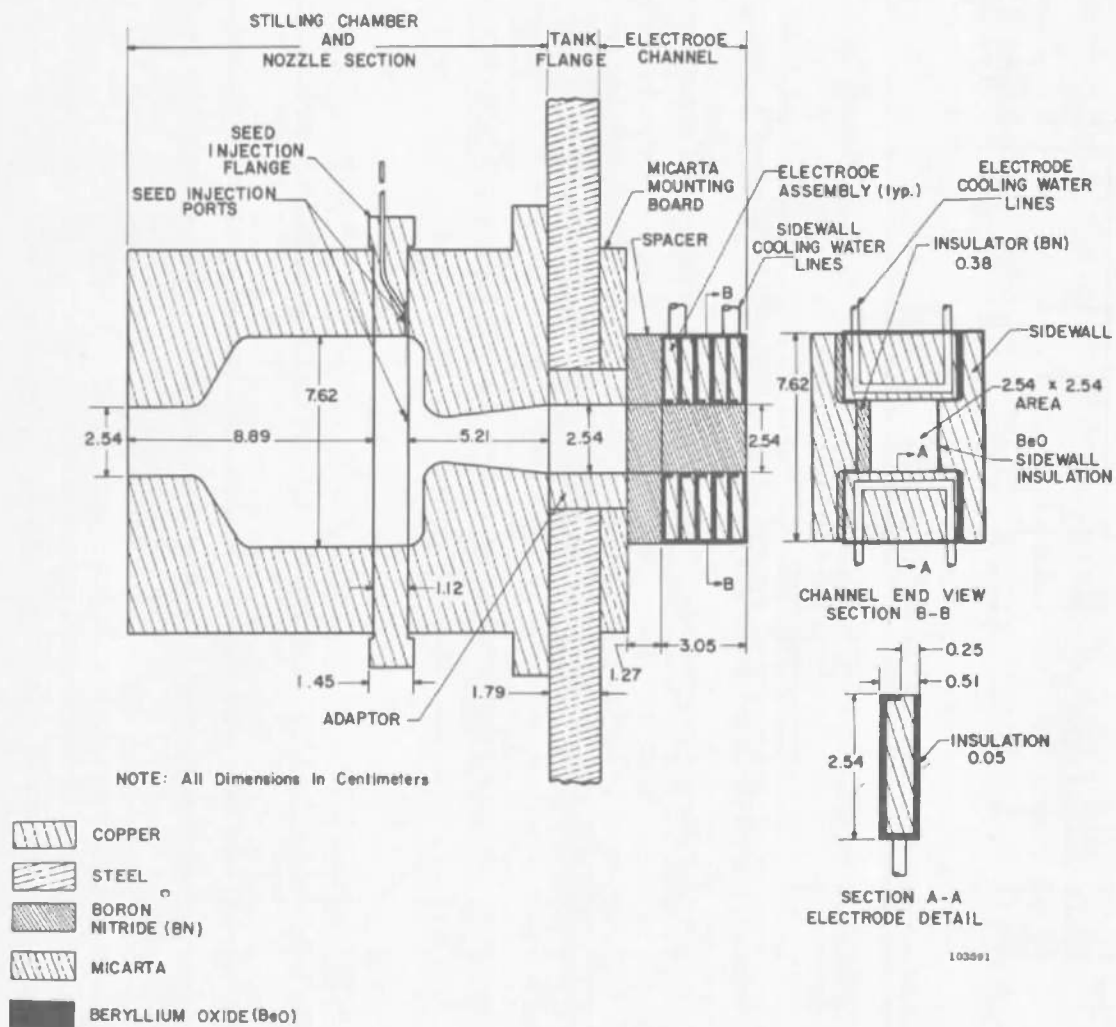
Schematic of Channel 1 Mounted on the Stilling Chamber, Seeding Flange, and Nozzle Assembly
